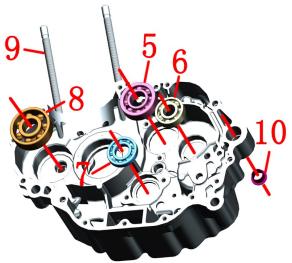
RIGHT CRANKCASE		Right crankcase disassembly 2	СНК	40)
